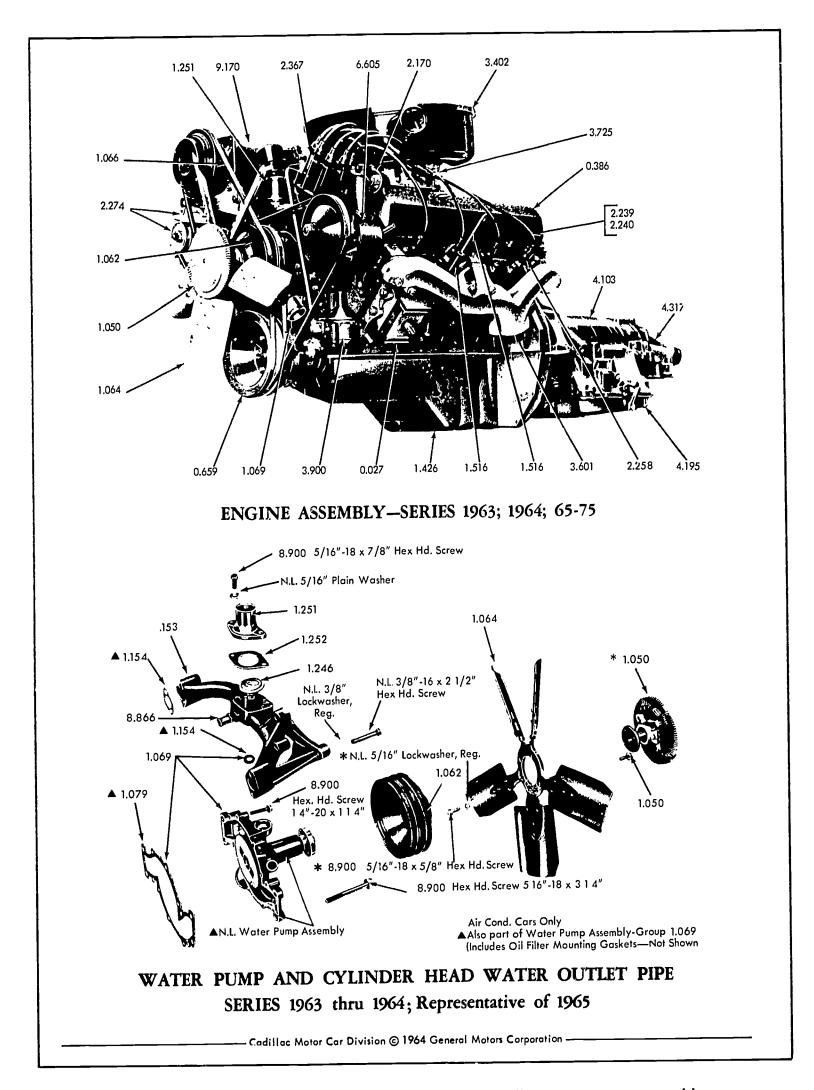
Specimen page of Cadillac parts catalog, illustrating engine assembly
